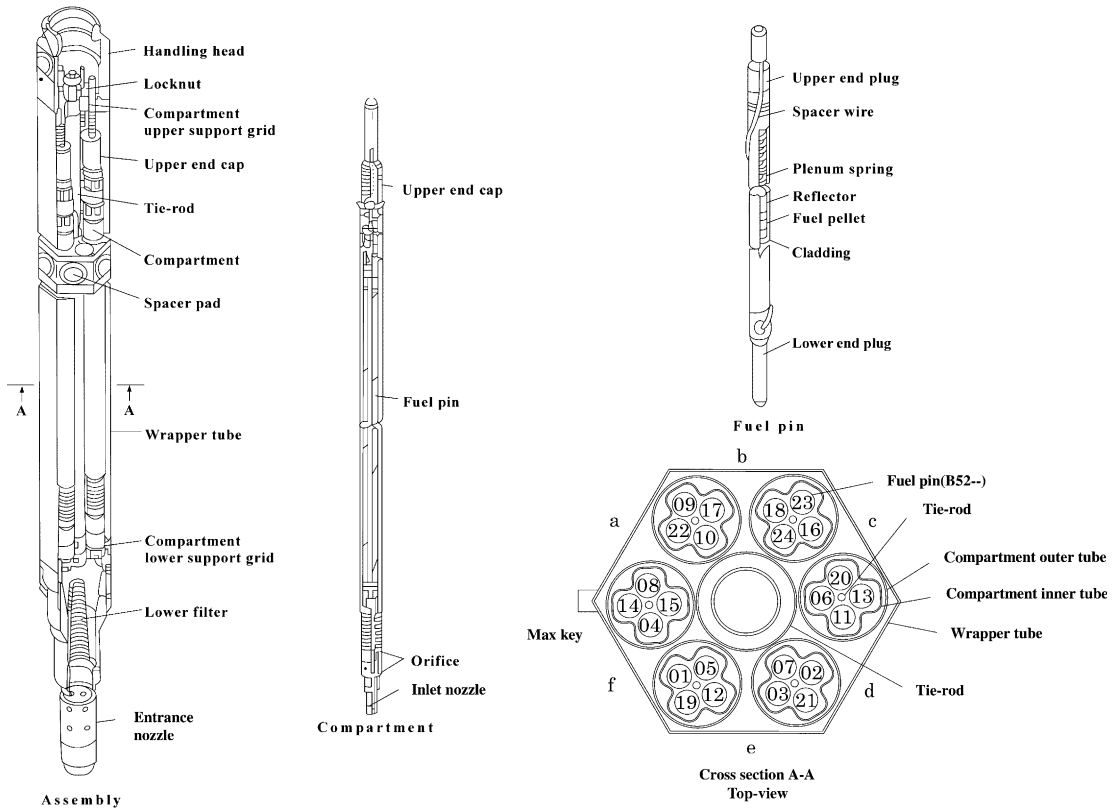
Schematic drawings of fuel pins and assembly irradiated in the B5D-2 test.
